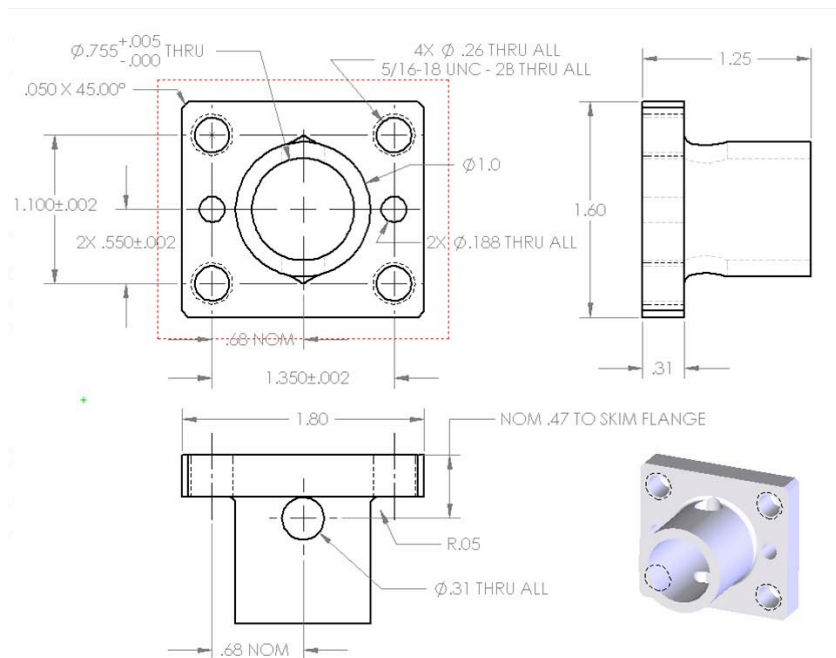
Drawing of Base Plate with Dimensions in Inches.
